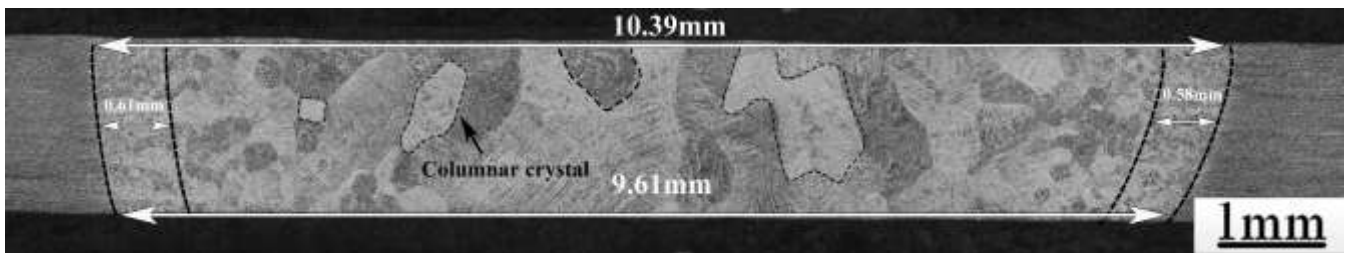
shows the macrostructure of the TC4 laser-welded joint. It can be seen that the laser welding is fully penetrated and the upper and lower surfaces are relatively flat. The width of the upper part of the weld is about 10.39 mm, while the width of the lower part is about 9.61 mm. The width of the weld is relatively uniform, and the laser penetration is good. According to the morphology of the microstructure, the welded joint can be roughly divided into three parts: the base metal region (BM), the heat-affected zone (HAZ), and the weld zone (HZ). The microstructure of the weld zone mainly contains coarse columnar grains, and some of the coarse columnar grains at the bottom are connected into pieces. When transitioning from the center of the weld to the base metal on both sides, the coarse grains gradually become smaller and denser. Some columnar grains are sharp-edged, which become finer and gradually transition to the base metal region in the heat-affected zone.
